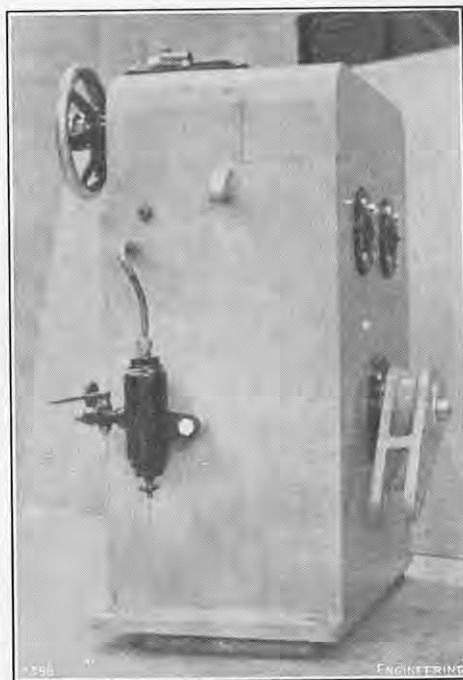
MOTOR, SHOWING "OUTPUT" LEVER.
